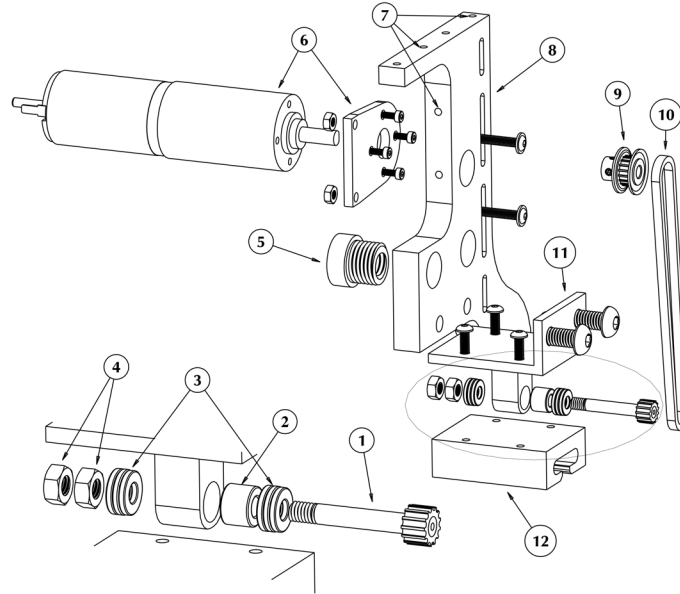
Single-tube stage assembly. Exploded view with (1) cannula holder assembly, (2) sleeve bearing, (3) thrust bearings, (4) jam nuts, (5) acme nut, (6) rotation motor and bracket, (7) cable carrier mounting holes, (8) cannula stage body, (9) motor timing pulley, (10) timing belt, (11) stage mounting bracket, and (12) carriage.
